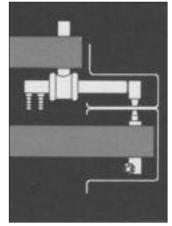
A universal holder (economical because it adjusts to many jobs) over a close-coupled holder.
